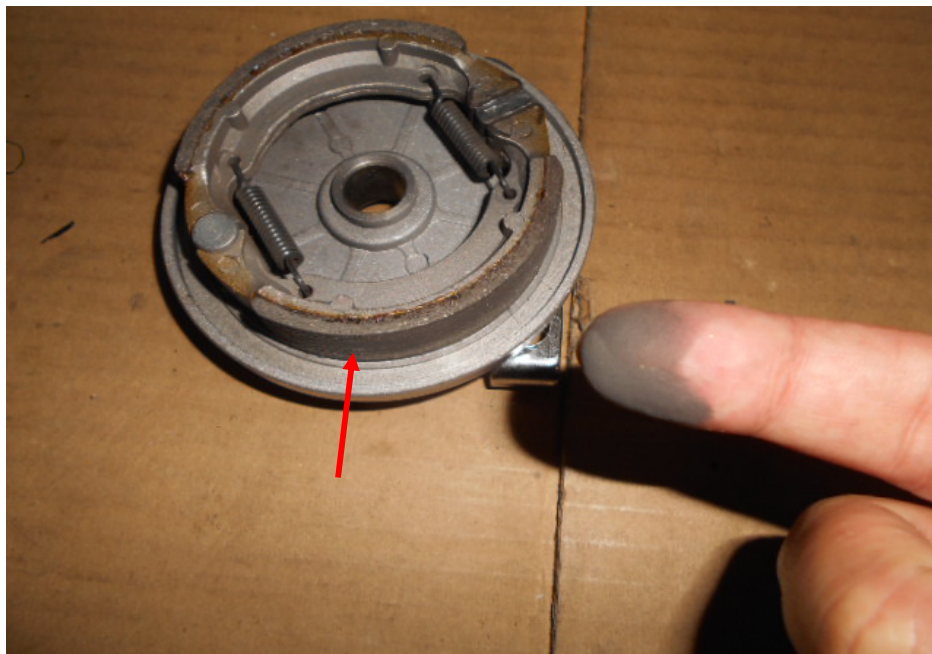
shows the brake dust that had accumulated on my finger upon touching the frictional material (arrowed) of the brake shoe. Brake dust is a normal phenomenon caused by the grinding of the frictional material of the brake shoe against the inner surfaces of the brake drum. Periodic cleaning to remove brake dust is required to maintain optimal braking performance.
